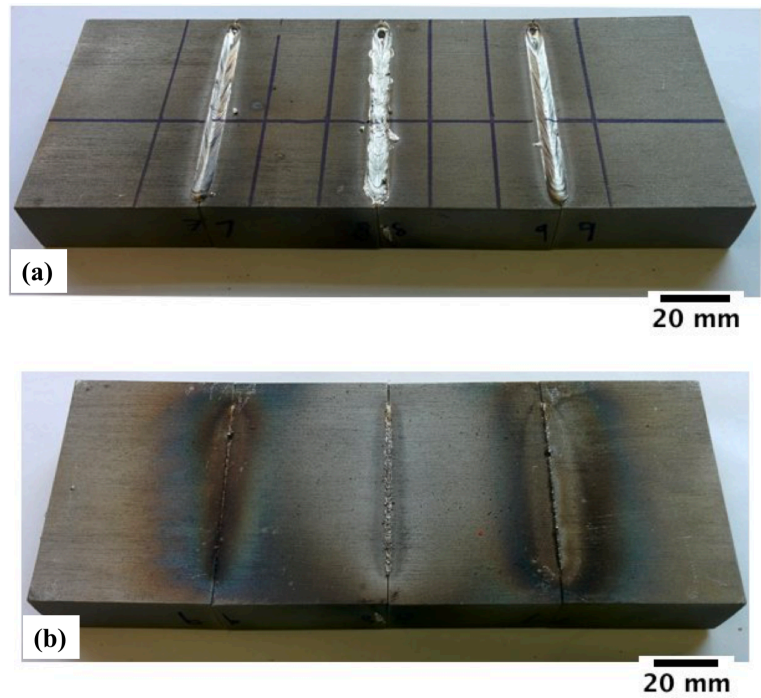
First butt joint welds. Joints 7to9, (a) top surface (b) bottom surface.
